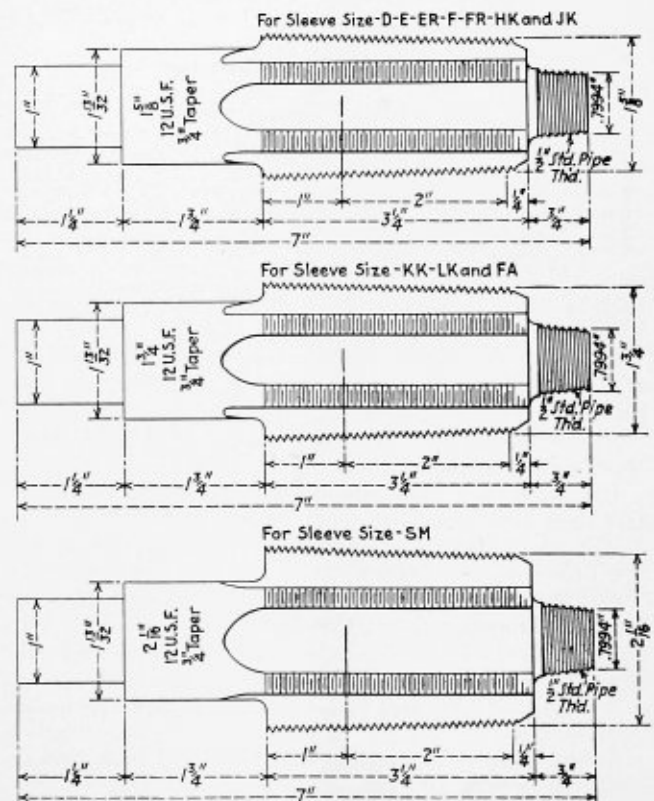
(Cont.)—Taper boiler taps (6 flutes)
